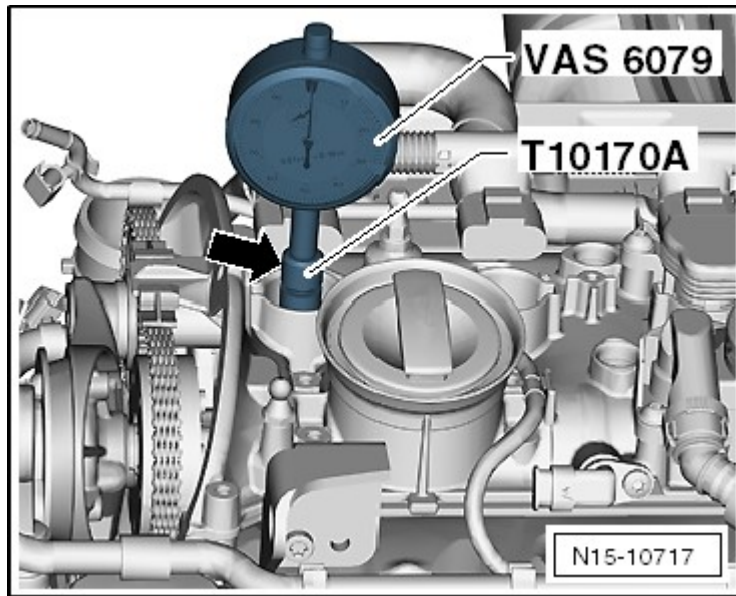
Turning Crankshaft In Direction Of Engine Rotation Until Markings Are On Top
